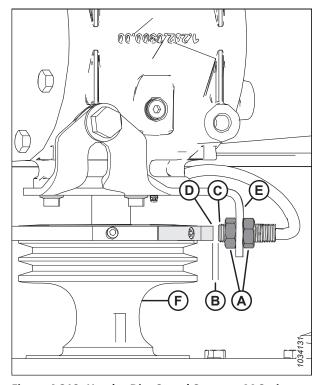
Header Disc Speed Sensor – M Series Self-Propelled Windrower Sensor Encoder Shown
